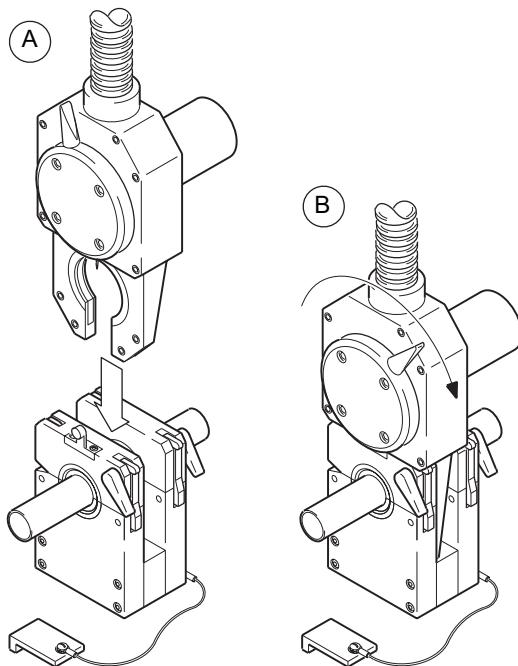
Mating the Weld Head to the Fixture Block
